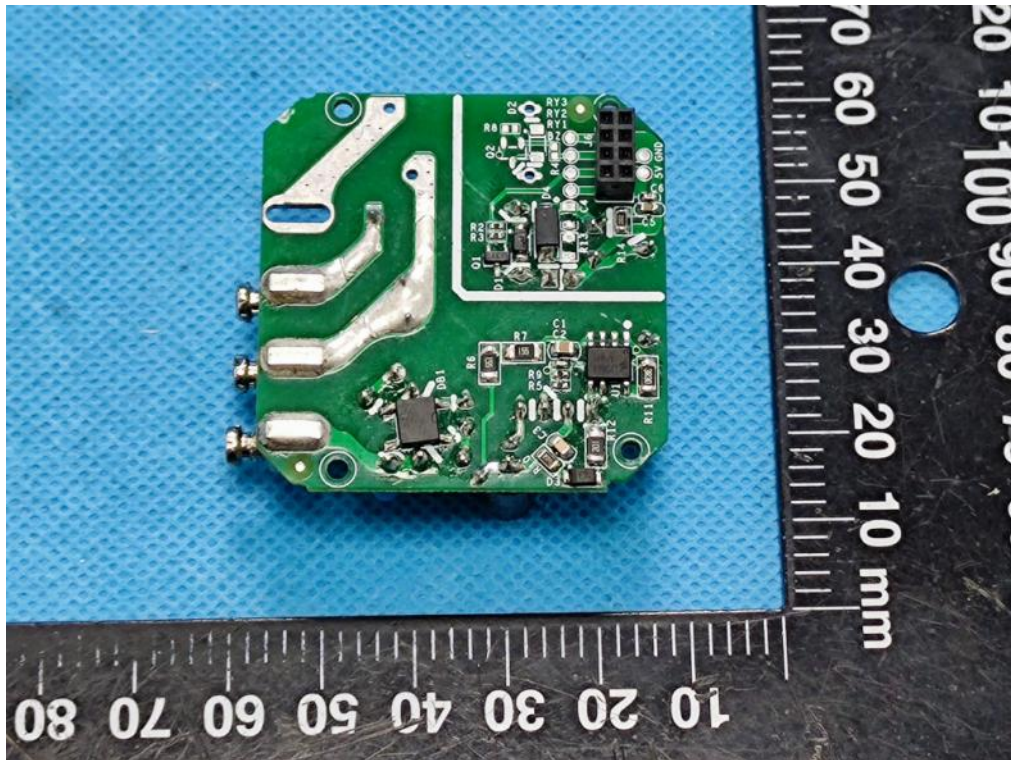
PCB bottom view of power board(Model: M5-1C-80)
